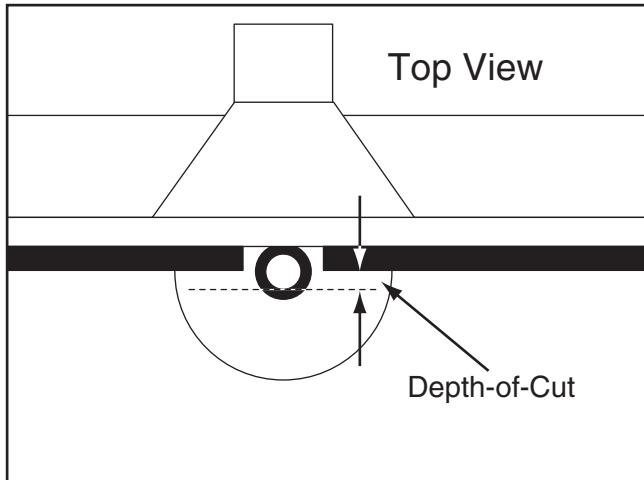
Groove cutting setup, top view (guard removed for clarity).
